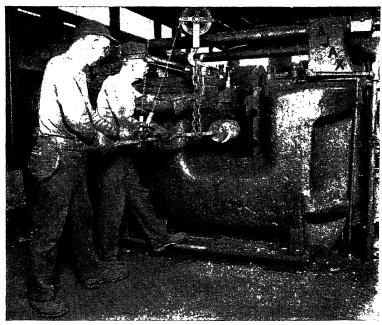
Upsetting machine. The two positions in the die are clearly visible. Note the small hoist to assist the men with heavy and hot workpieces. (Bethlehem Steel Co.)
